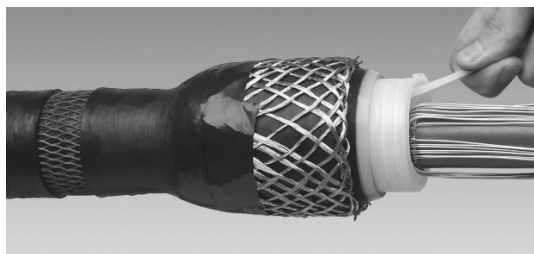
Assembly of a permanent elastic joint by cold-shrinking technique: Joint (including outer tube) that is pre-stretched and present on a spiral is arranged over the connecting point and is lowered by pulling out the spiral (left to right in the image), Figure 7.1.1-6 shows a section after the assembly. Photo Tyco Electronics, now TE Connectivity.
